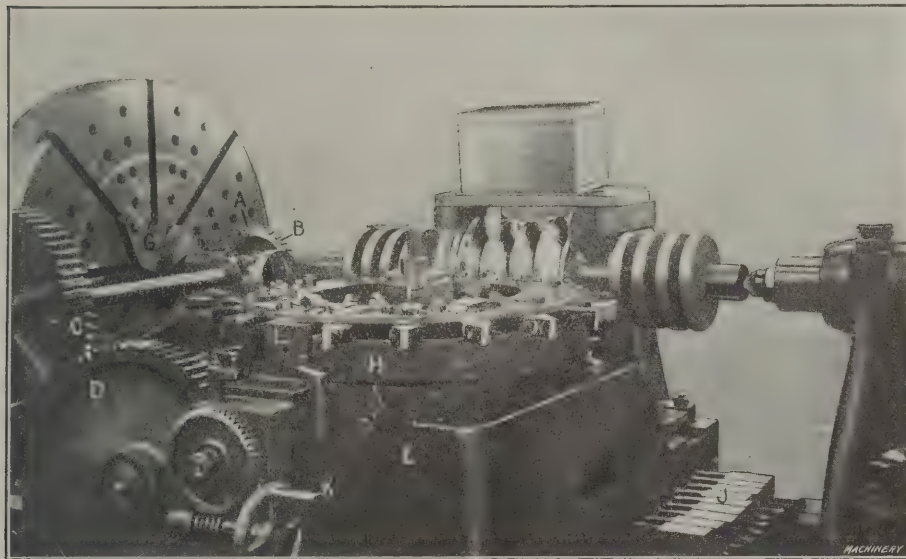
Generating Thread of a Large Hindley Worm for the Battleship New York
